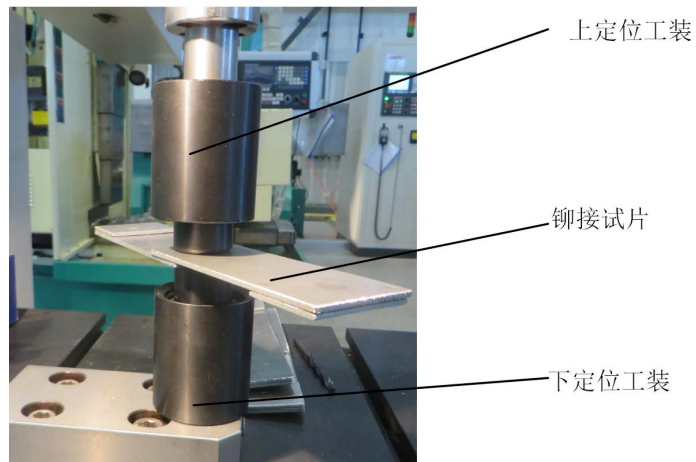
Use of the Non-head Rivet locating fixture on the press riveting machine
